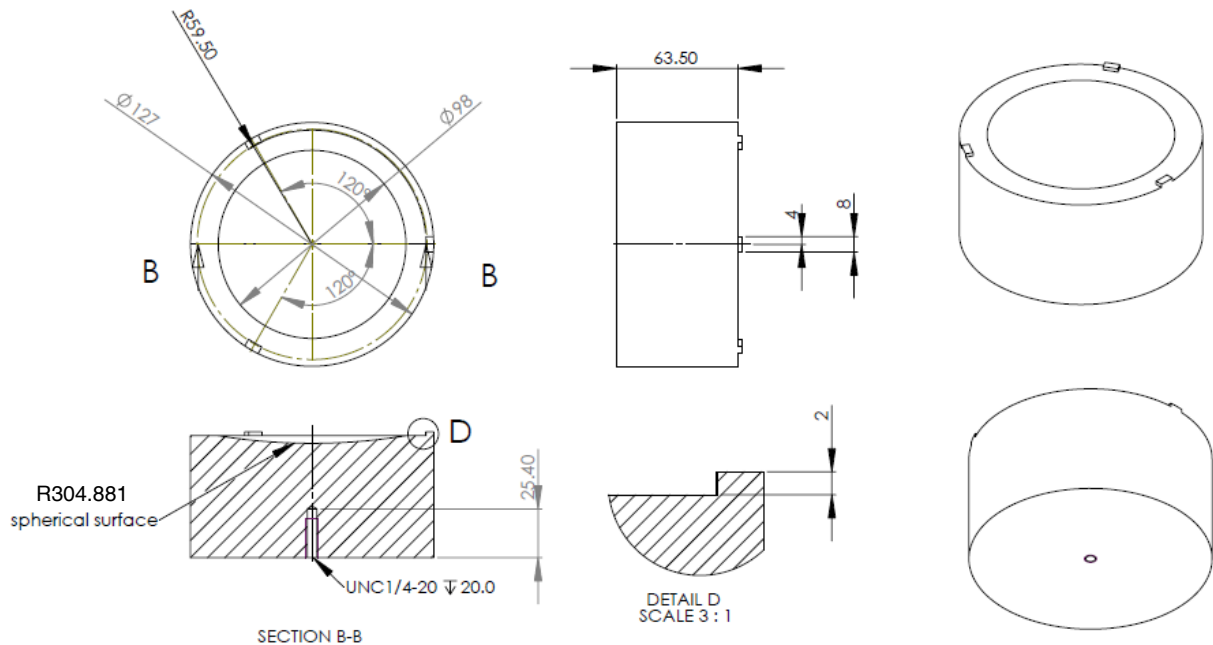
Optical blank used for the mirror and fiducial fabrication.
